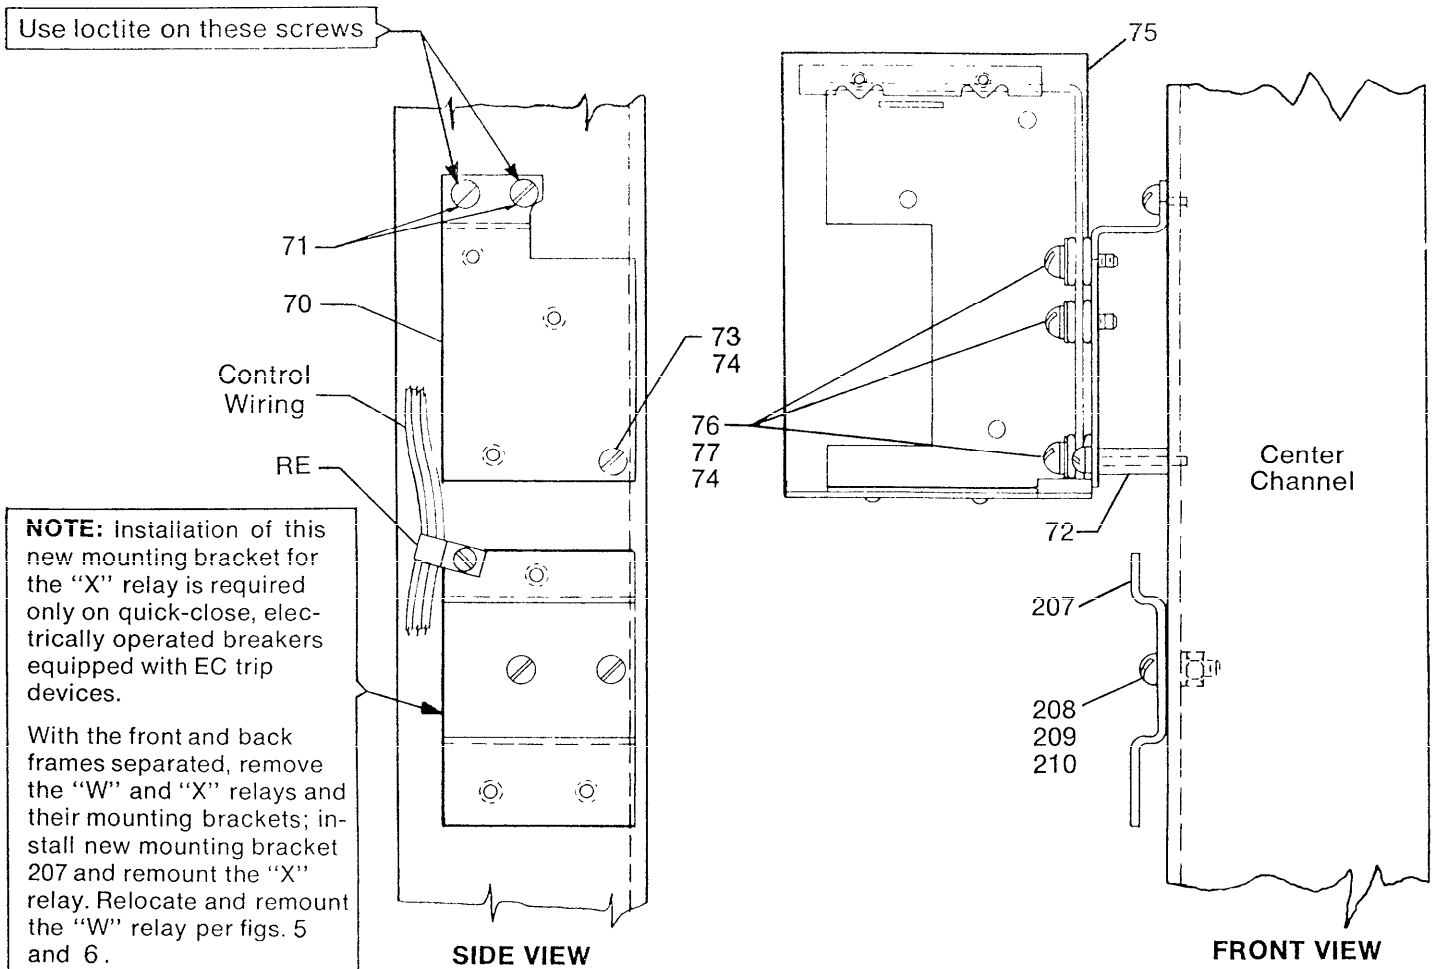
Installing SST programmer mounting bracket on center channel of front frame; remounting the “X” relay.
